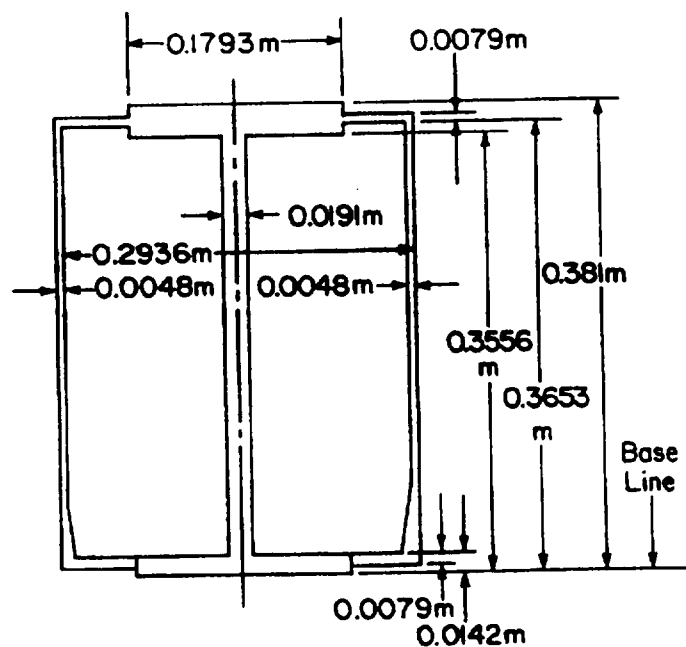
Bottom Carriage Section Properties at Section 4 (Ref. 6)
